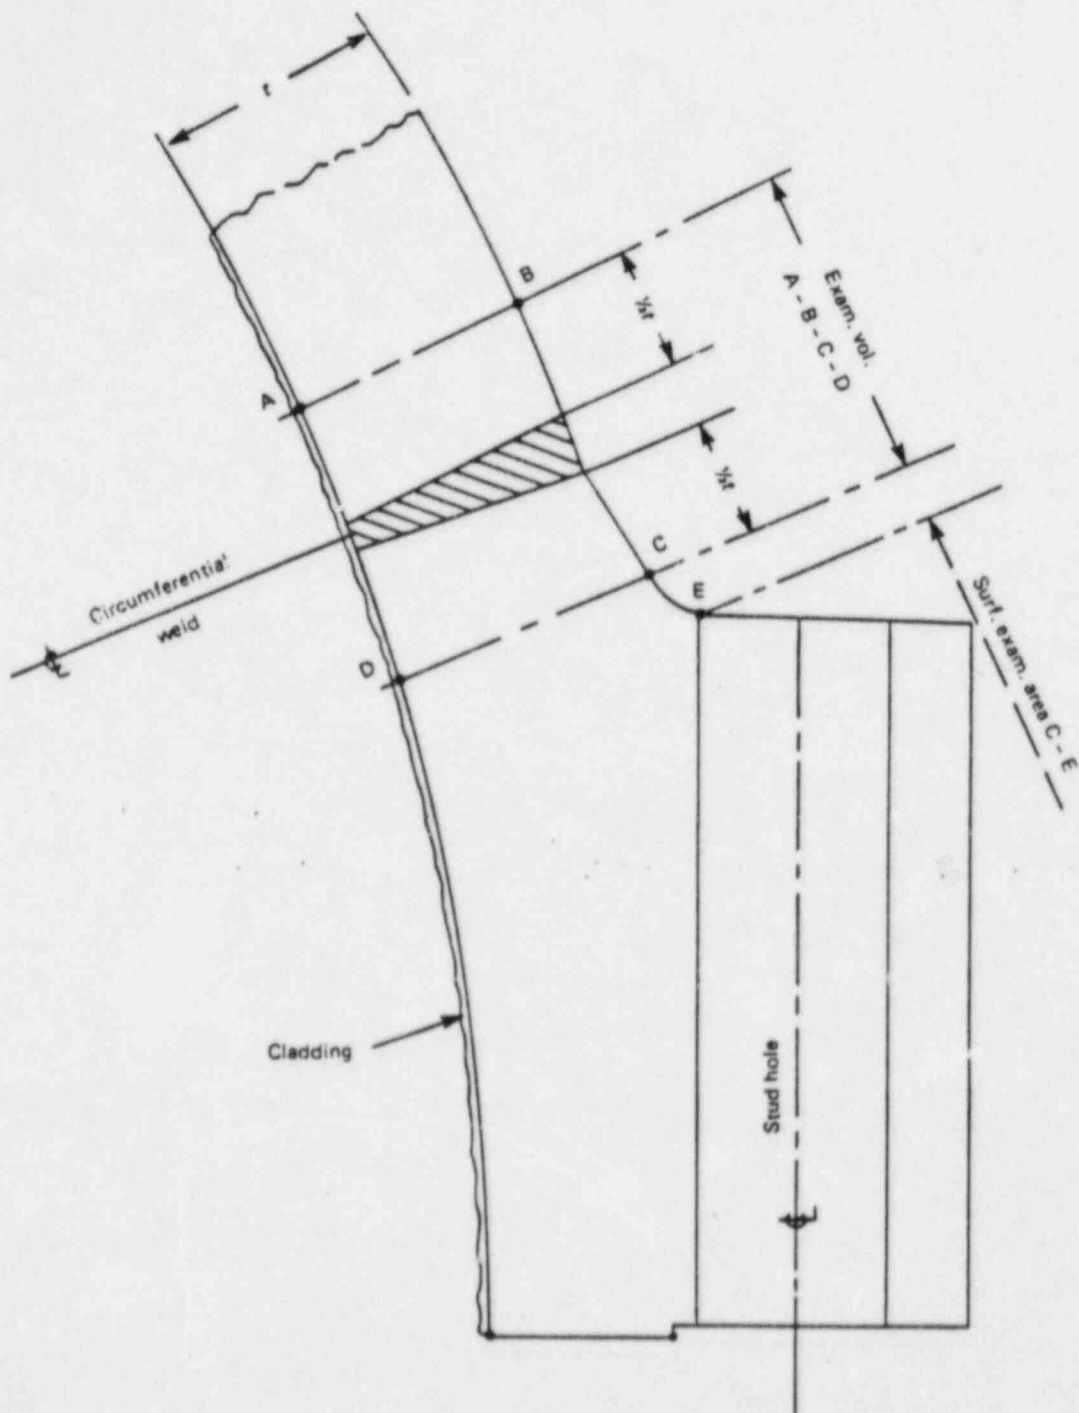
HEAD-TO-FLANGE WELD JOINT
